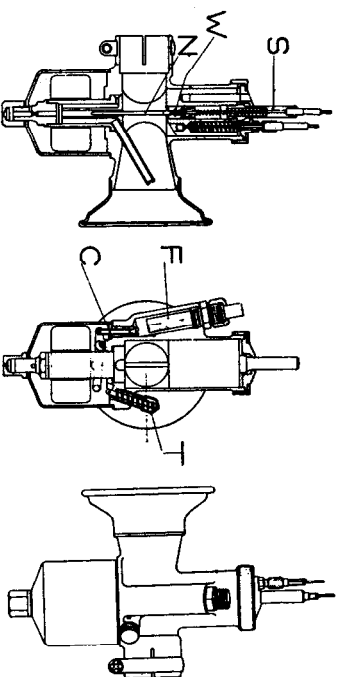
THE HEAVYWEIGHT CARBURETTER.
